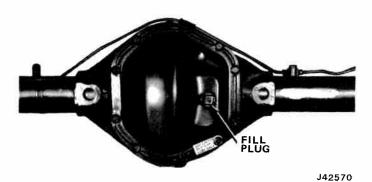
Rear Axle Filler Plug Location (Front Axle Similar)
